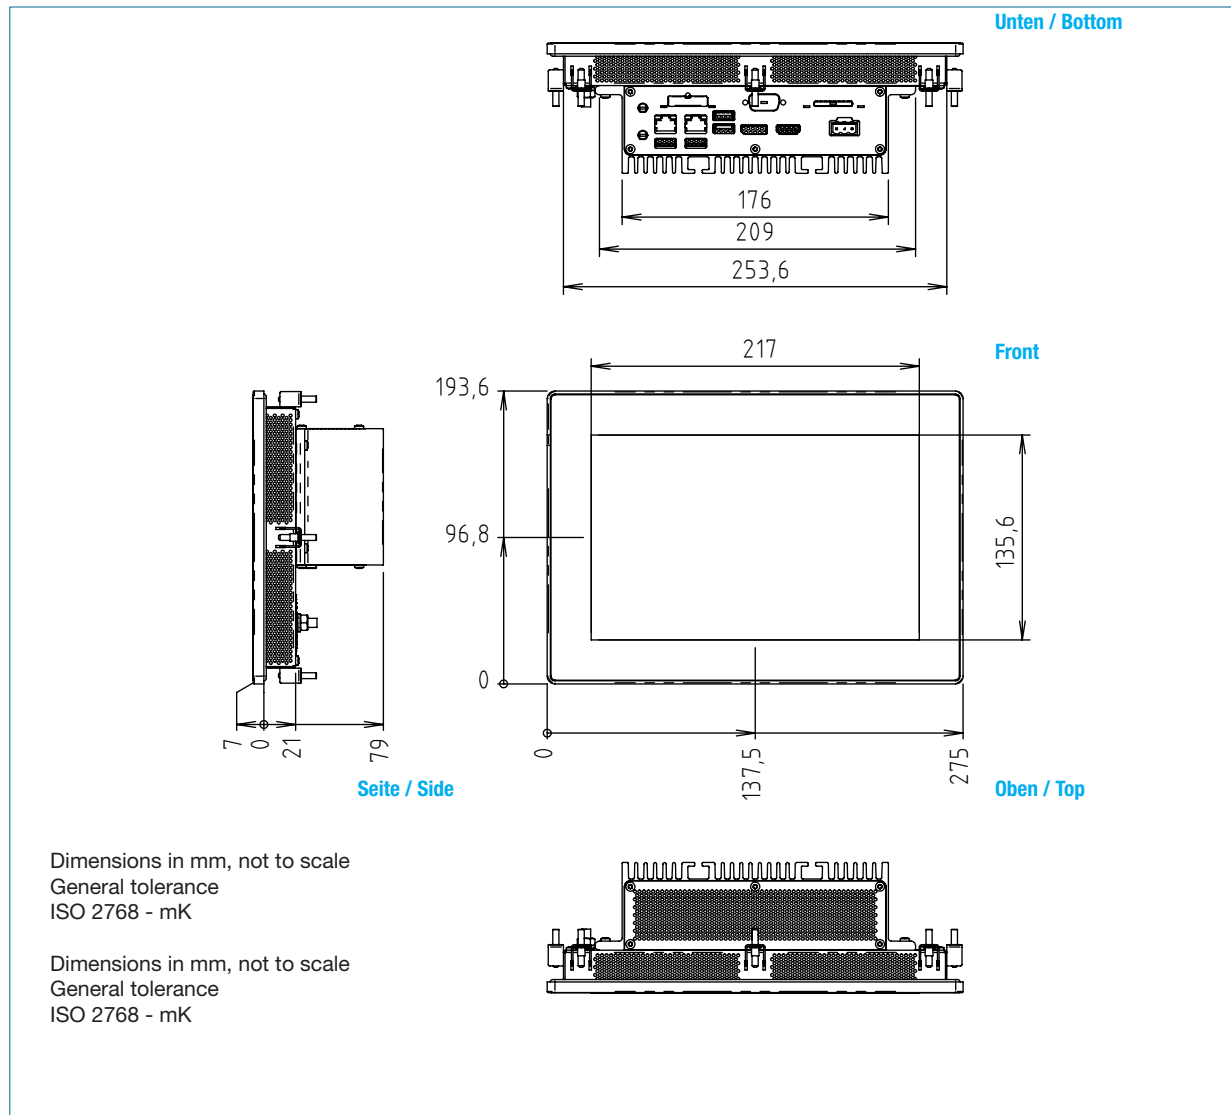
10.1" Prime Panel Pico Installation - device dimensions
